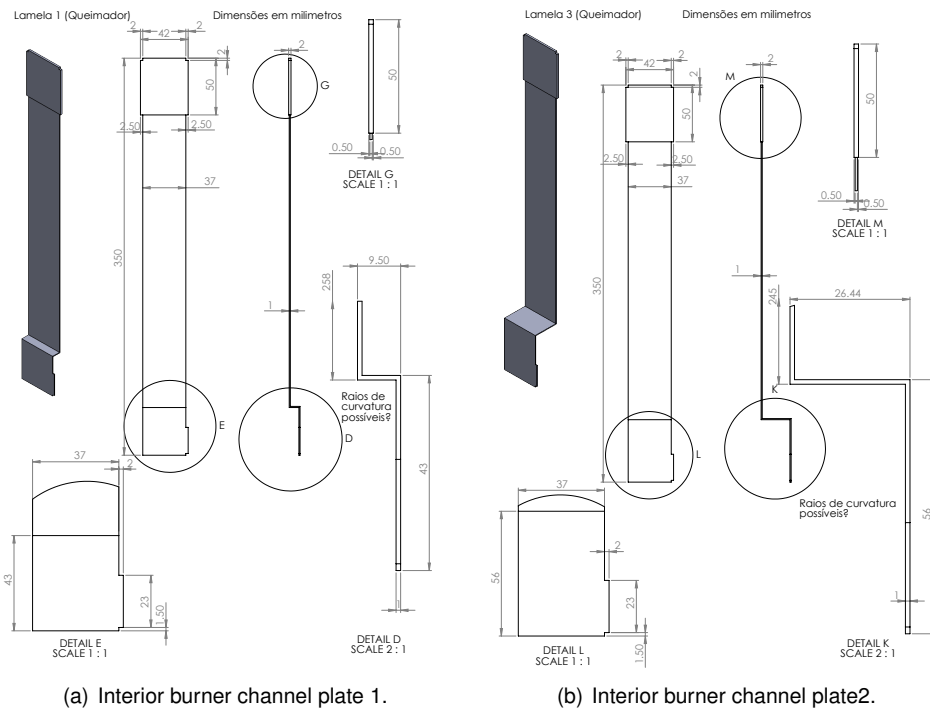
Interior burner plate technical drawings. (Dimensions in millimeters)
